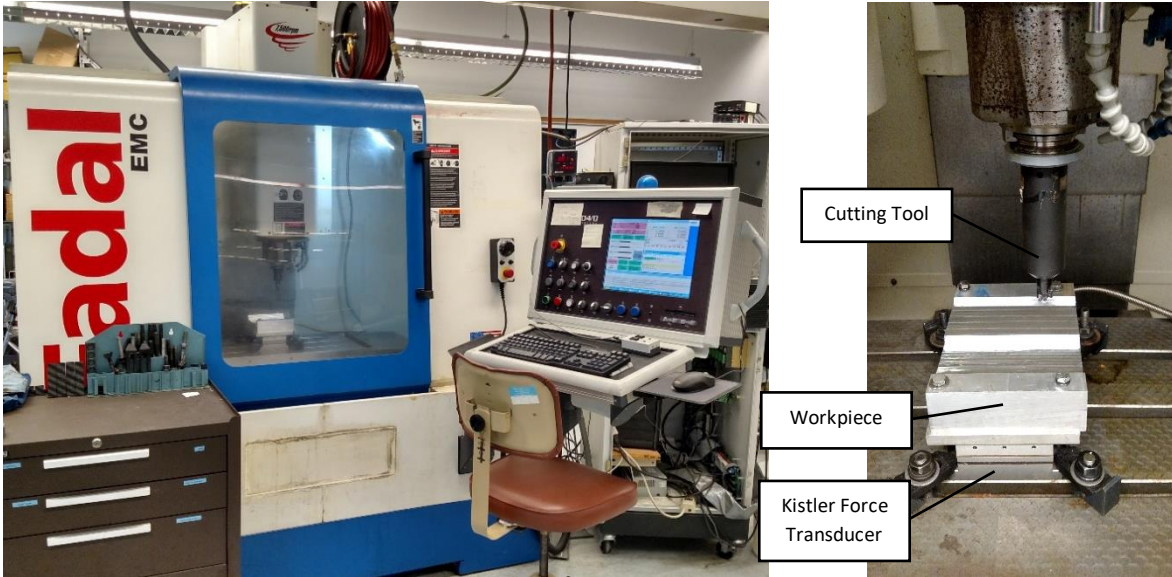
Fadal CNC milling machine. Overall setup (left) and close up of spindle and work piece mounted on Kistler force dynamometer (right).
